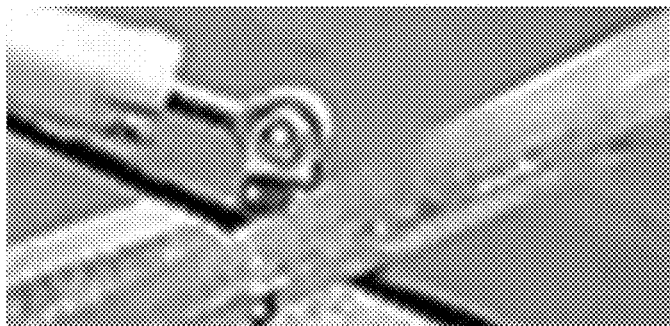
(EXAMPLES OF SPHERICAL BEARINGS/FISHEYE OR ROD END BEARINGS)
